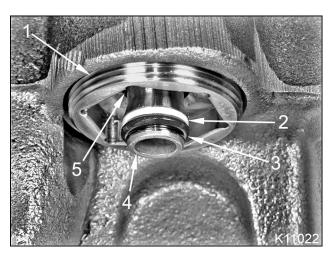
Injector oil inlet adapter installed in high-pressure oil manifold
